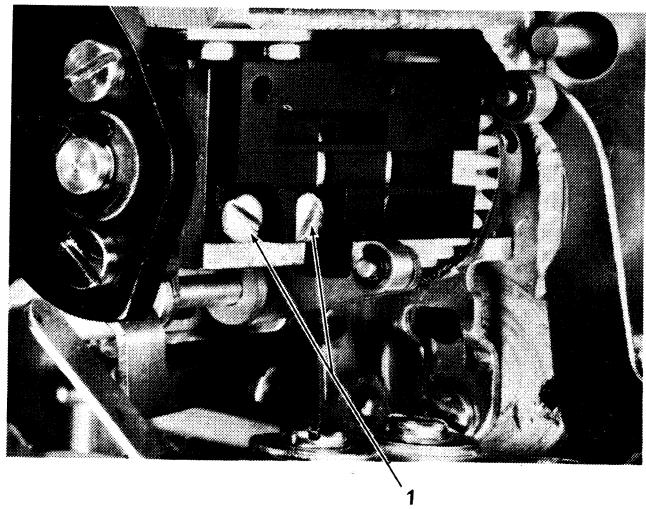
Print Feedback Removal (Circuit Board Removed)
